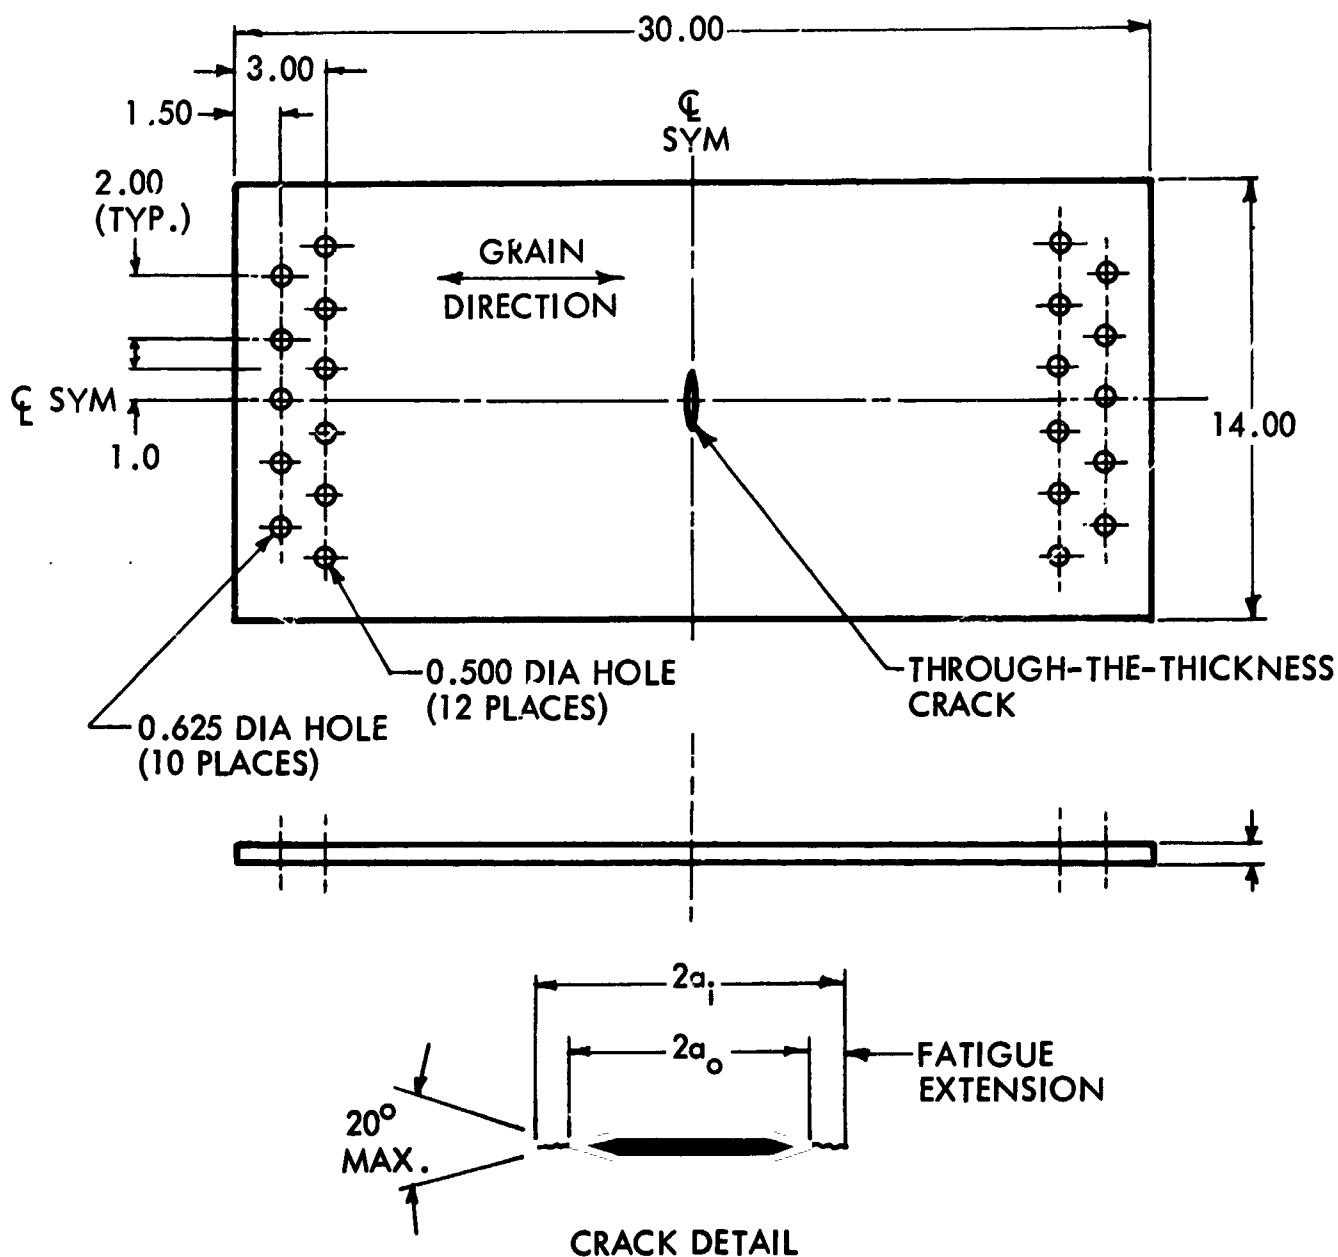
THROUGH-THE-THICKNESS CENTRALLY CRACKED FRACTURE TOUGHNESS SPECIMEN
